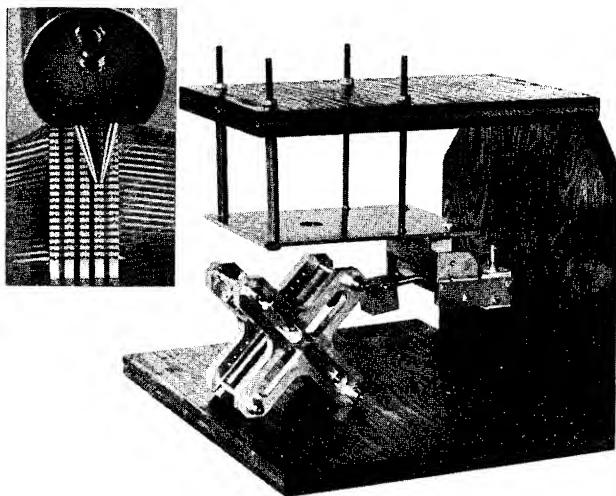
Complete access fixture with finger hold-down device mounted outside the electron beam vacuum chamber to simulate actual operations.
